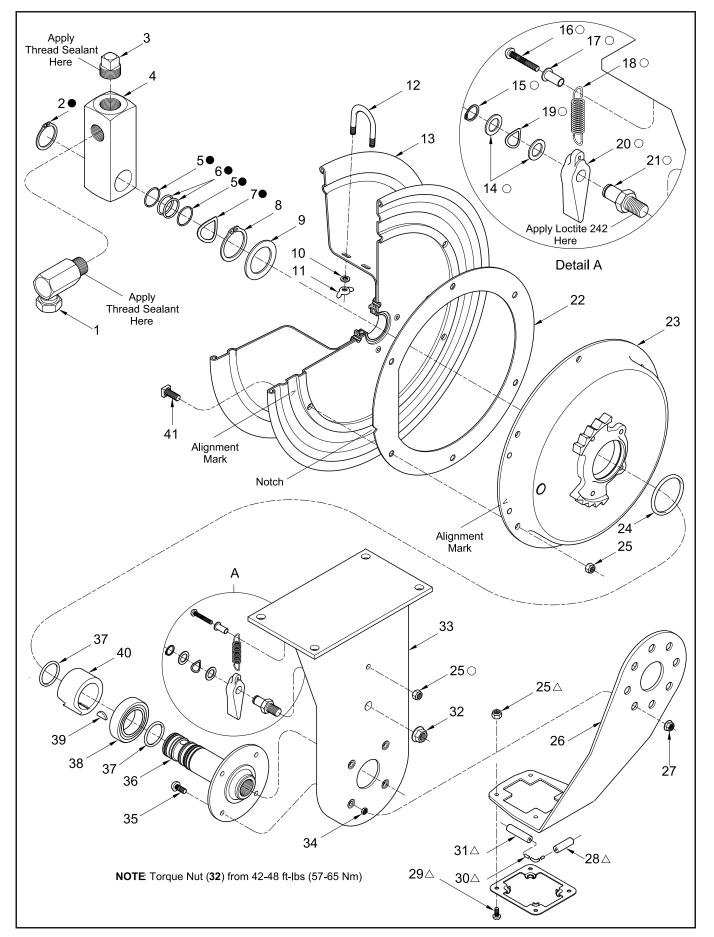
Severe-Duty Fuel Hose Reel Model 7337-C - Exploded View
